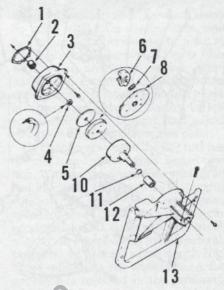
A - Exploded view of ST-400 clutch assembly.
